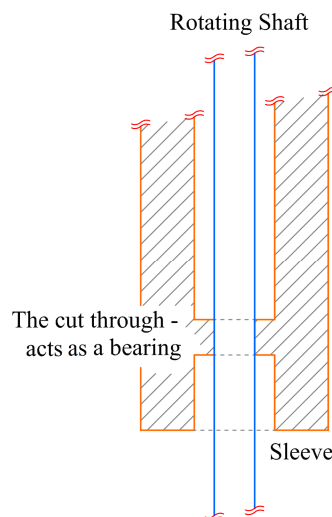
The cut through the sleeve which acts as a bearing to hold the rotating shaft
